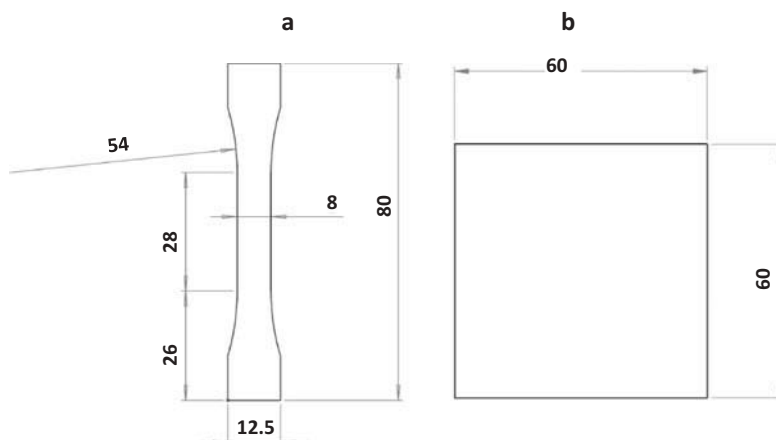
Mould used in the manufacture of adhesive bulk plates.
